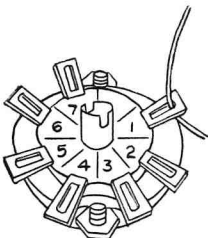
This lead stays in place by itself when properly positioned. The idea is to leave one hand for the soldering iron and the other to hold the solder.
